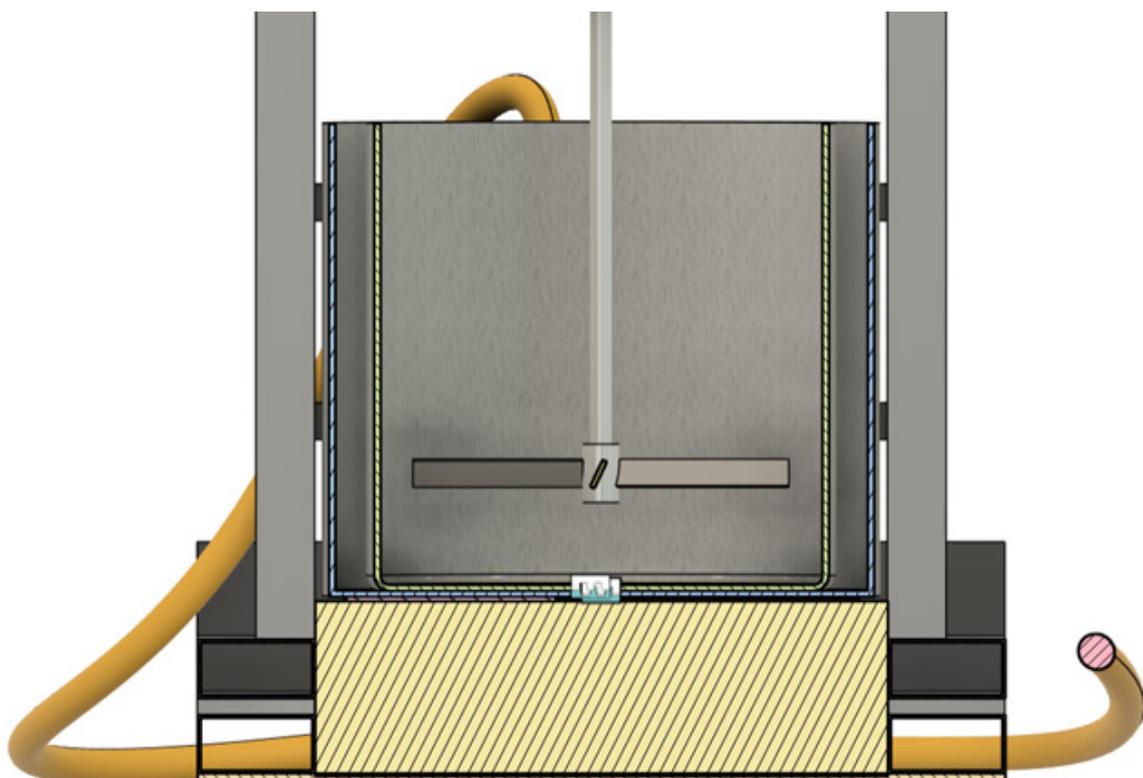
Cross section of the main assembly where the jacketed vessel is visible.
